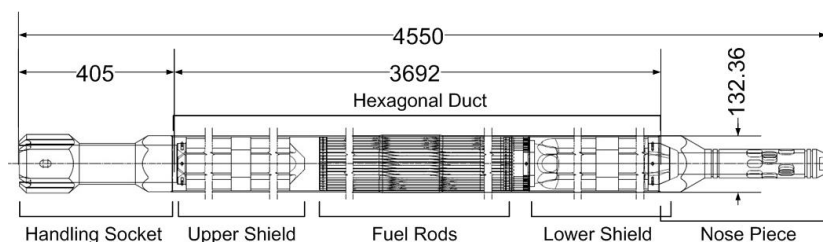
Schematic view of SFR fuel assembly (unit: mm)
